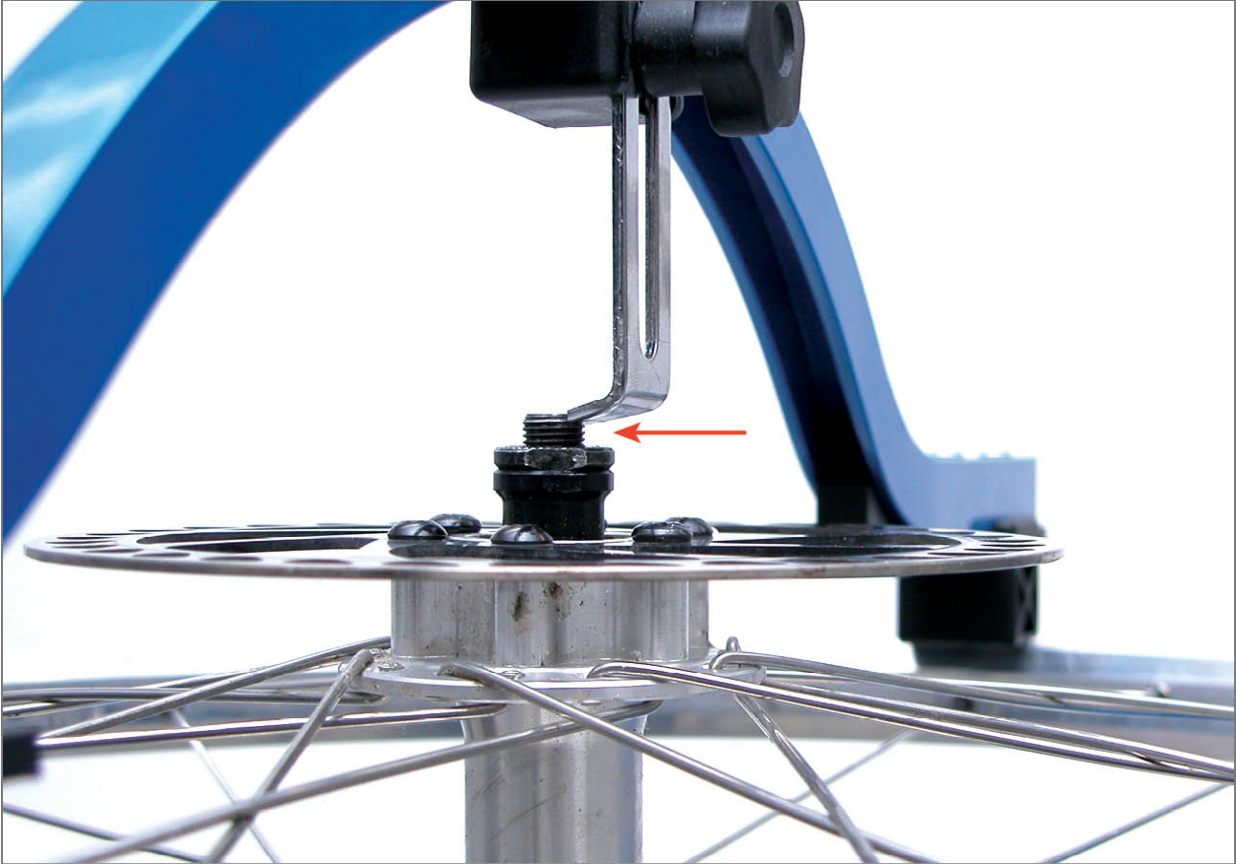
Gauge indicator showing rim centering error relative to locknut face
